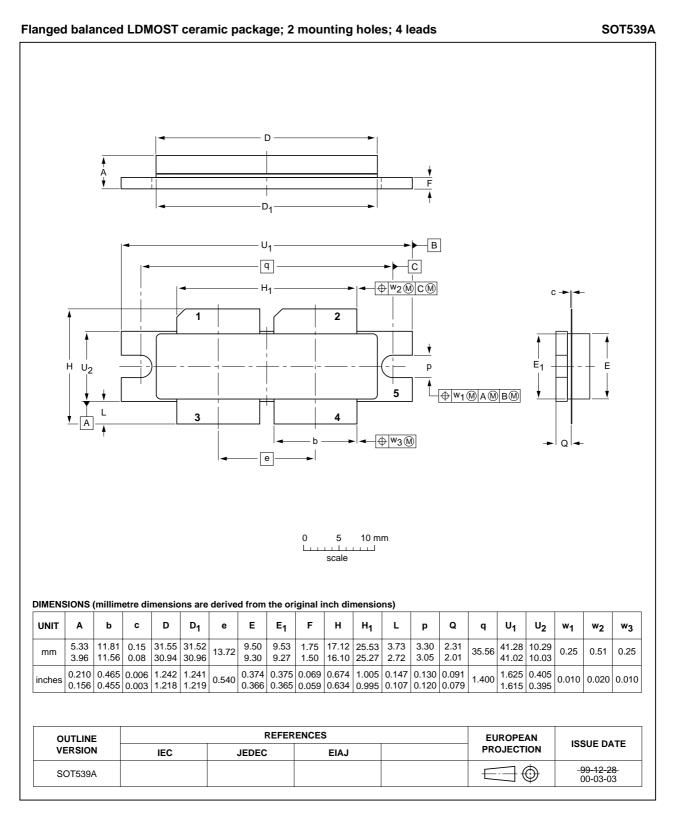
Package outline SOT539A BLF6G20-180P_1 Objective data sheet
